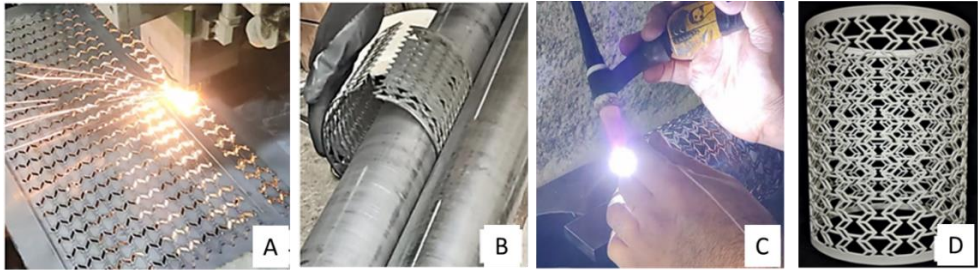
Manufacturing sequences of the experimental samples: (A) laser cutting; (B) three rolls bending; (C) TIG welding; and (D) painted metastructural cylinder.
